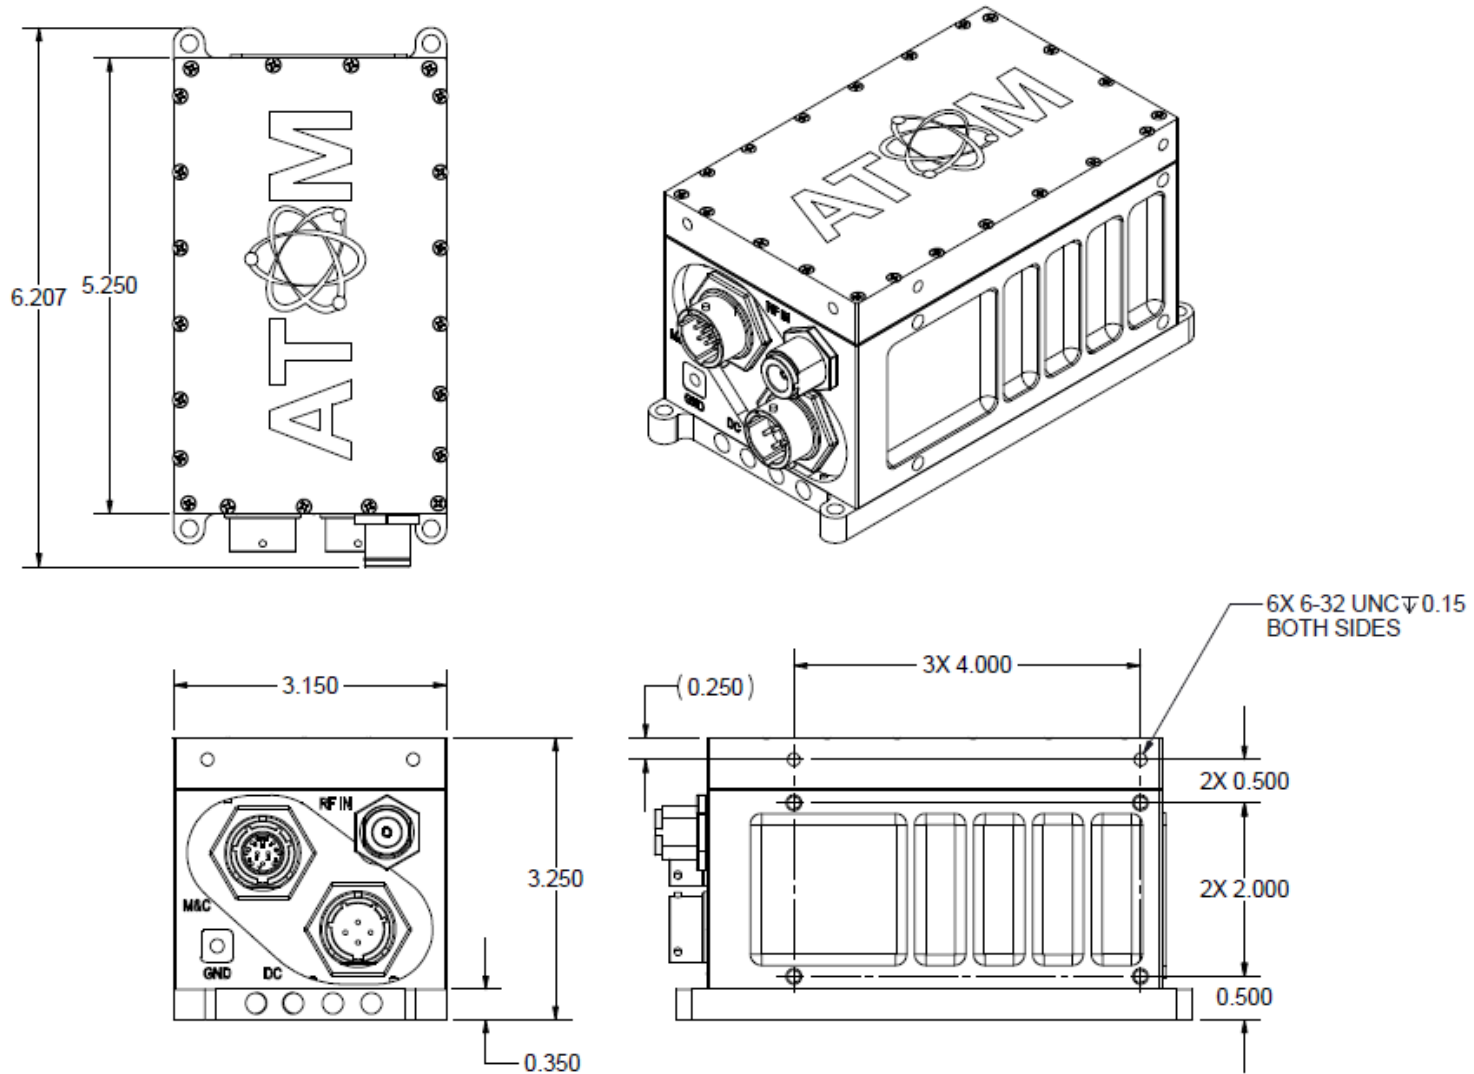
20W and 25W KU SSPA/BUC Assembly, without Fans
